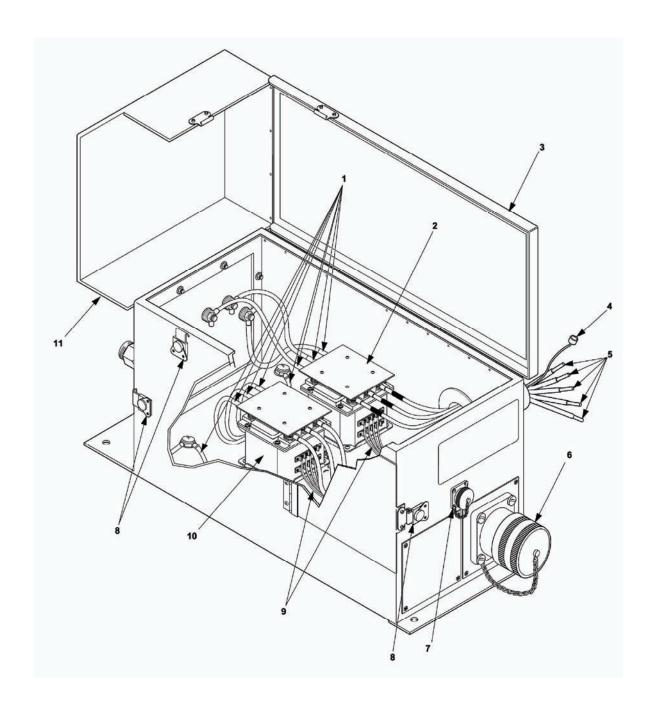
Switch Box Assembly Test (B&C Models).
